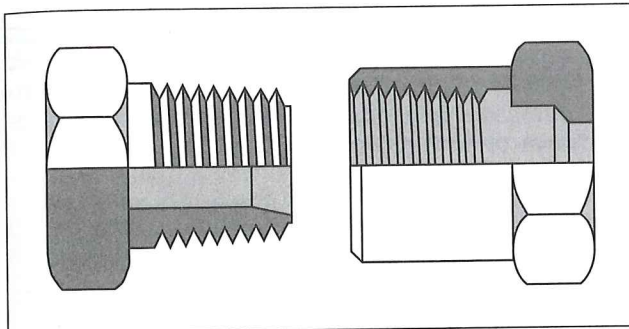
Pipe threads seal by metal-to-metal interference.
